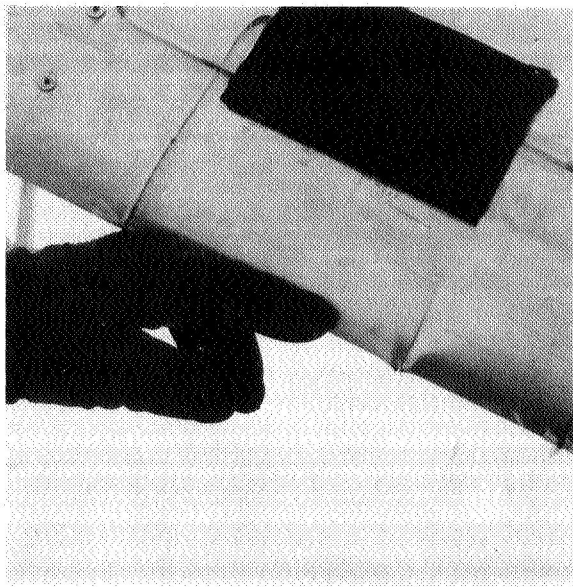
View of Blade skin buckling and cracking in unsupported area. Note leading edge cracks and skin peeling.
